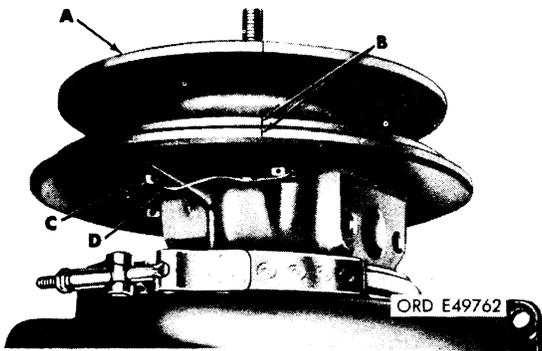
INSTALLING COMPRESSOR BACK PLATE AND PERFORMED PACKING ON BEARING HOUSING - TURBOCHARGERS 10912638 AND 53591-C-139552.
